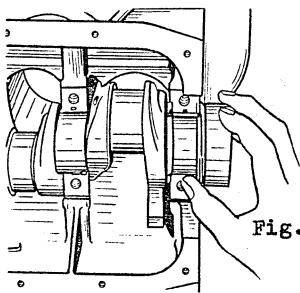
Installing the Thrust Half-Rings on Rear Support
